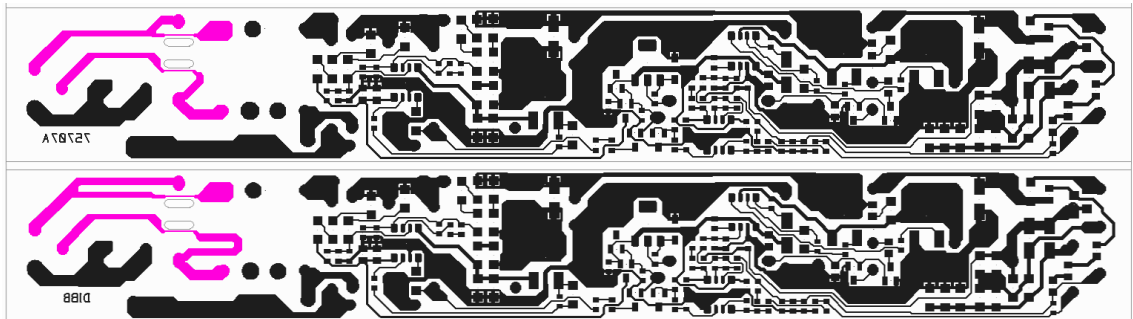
Supply traces from connector to RFI-choke on bottom copper layer.
